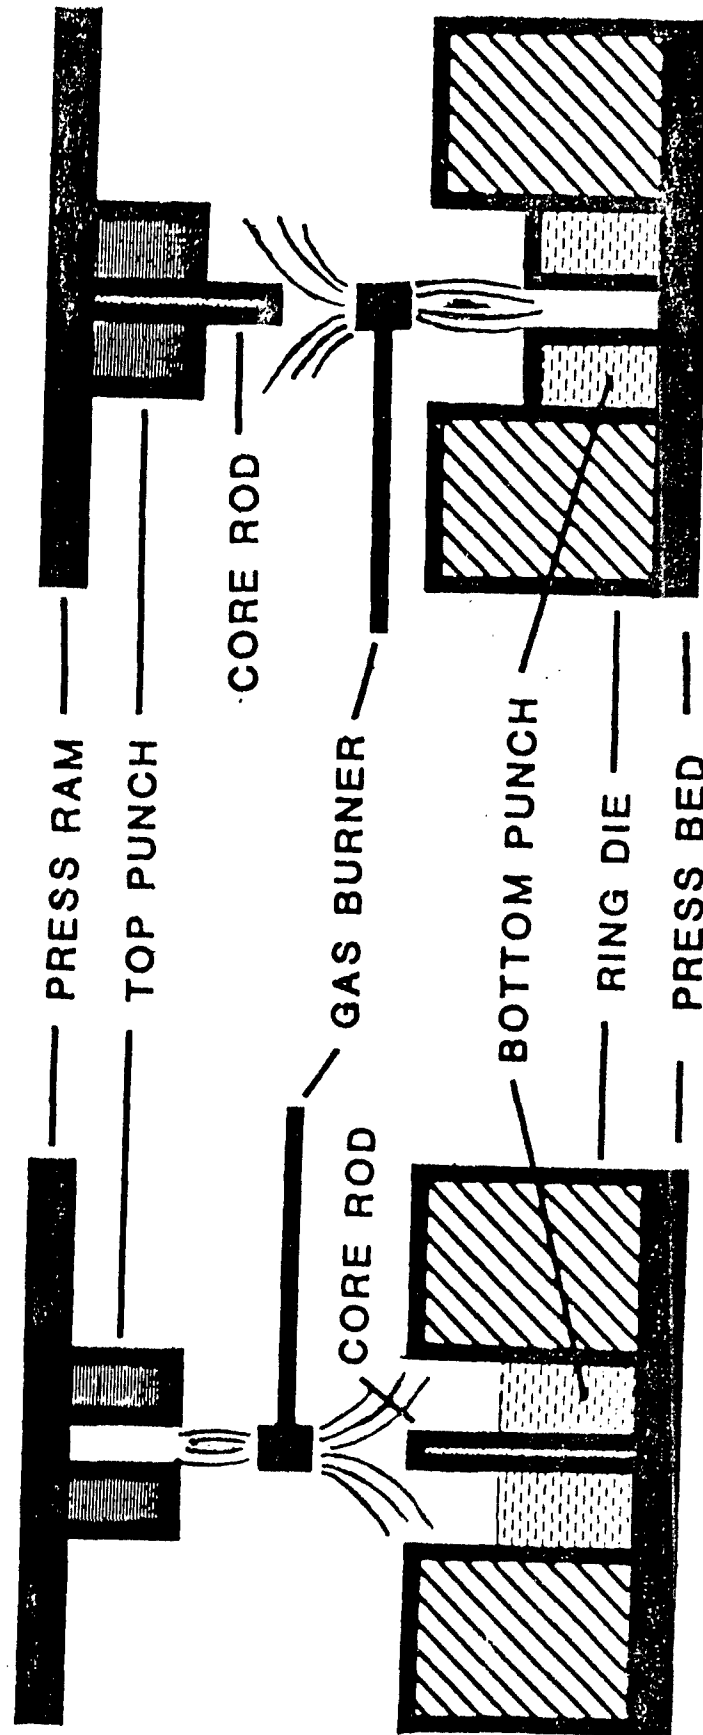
Comparison Between Tooling Approaches for the NASA Test Gear and AGT 1500 No. 6 Gear.
